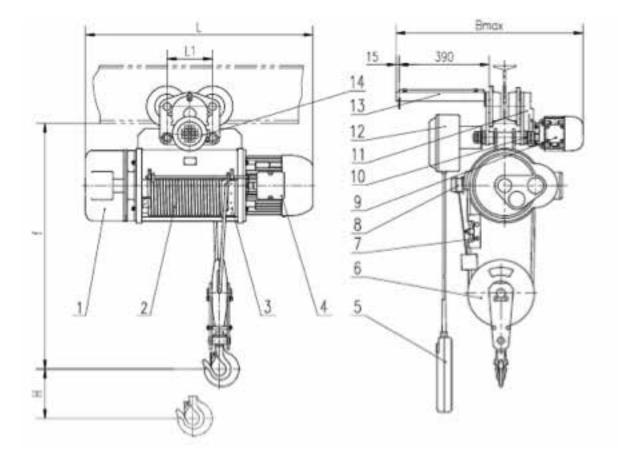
Outline Structure Drawing for PWMD3T24M and PWMD5T24M Electric Hoist
